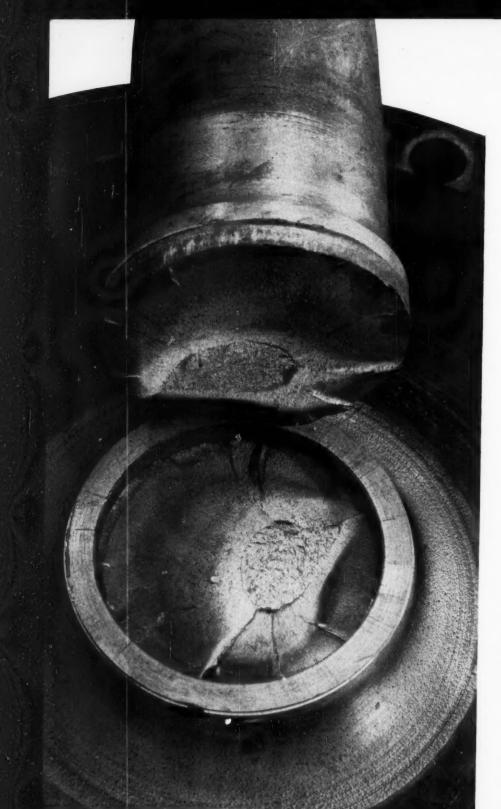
Typical fatigue failure of shaft with shrink-fit hub
